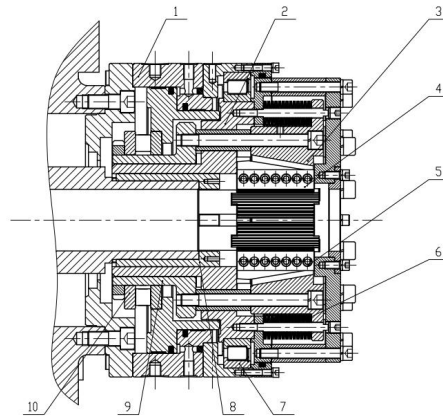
The composition of the hydraulic chuck of EDG-300 drilling rig. 1-Clamping; hydro-cylinder; 2-Revolved Body; 3-Ferrule; 4-Slips; 5-Reset spring; 6-Disc spring; 7-Bearing; 8-Flat key; 9-Sliding sleeve; 10-Bearing.
